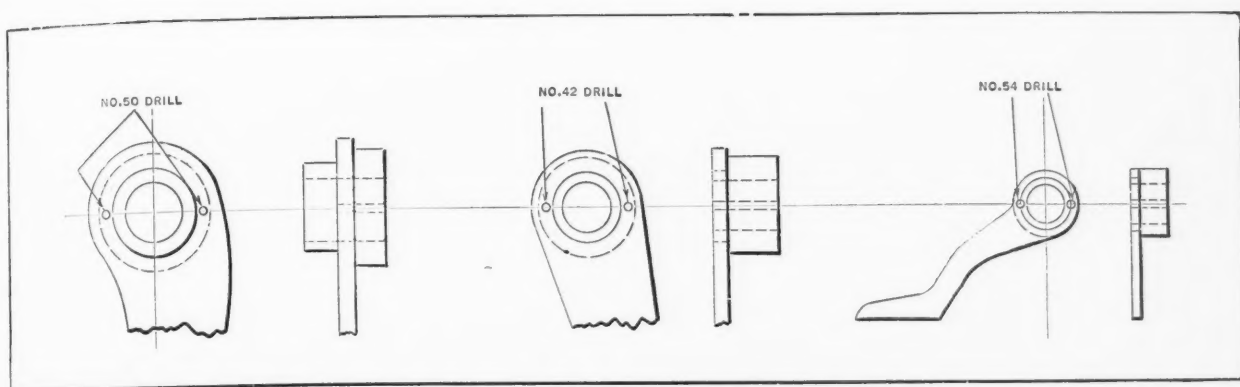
Examples of Work Drilled on Pneumatically Controlled Machine
